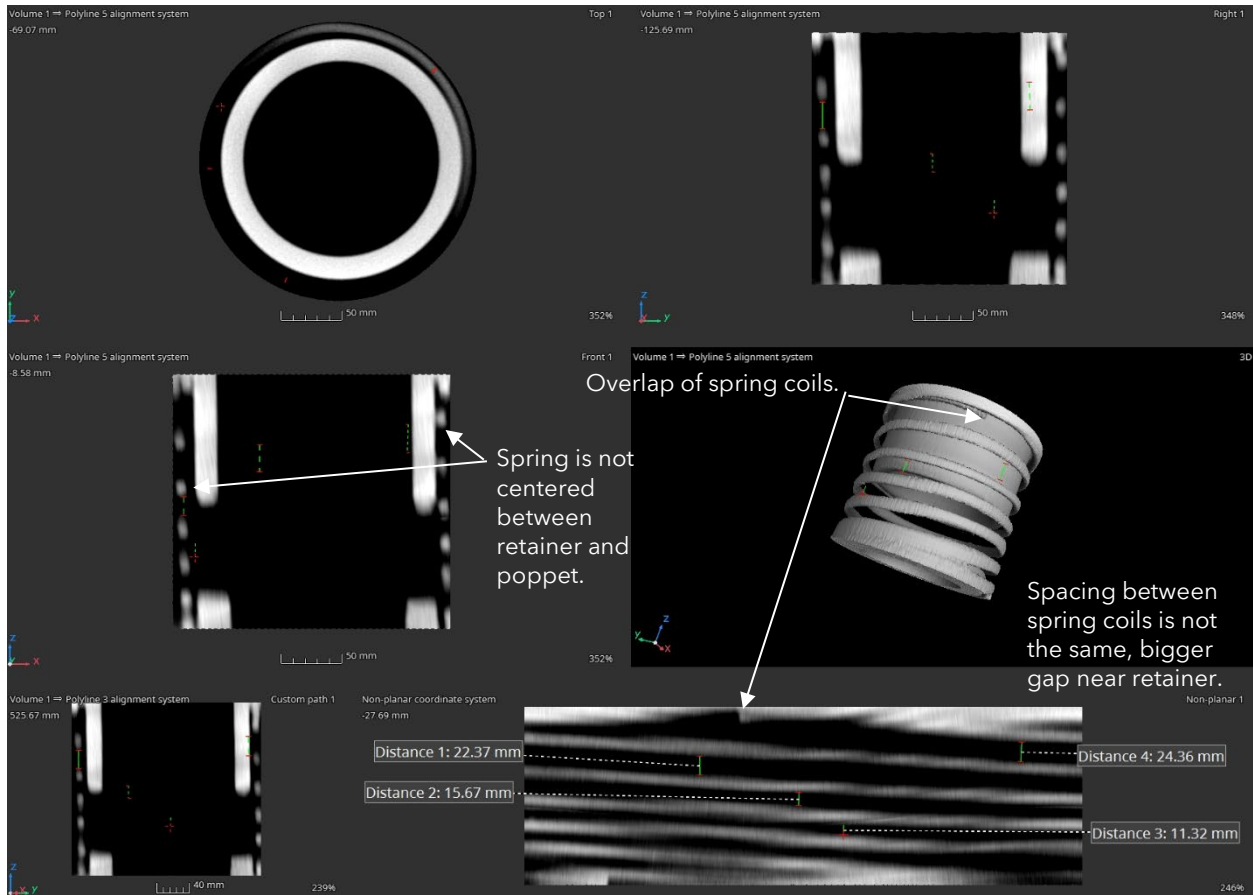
CT images of the shimmy damper check valve spring with remaining check valve digitally removed.
